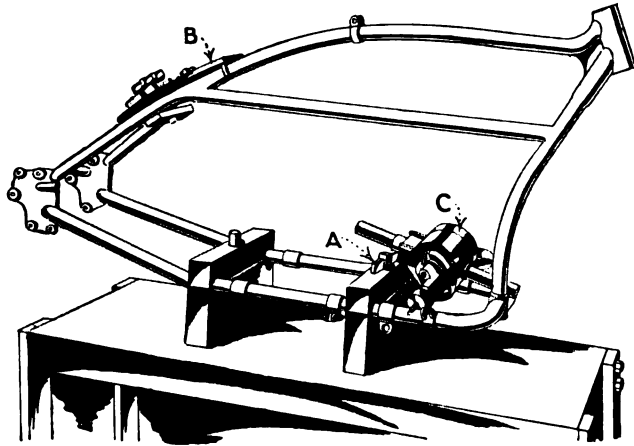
HOLDING FIXTURE FOR SMALL DRILLING
